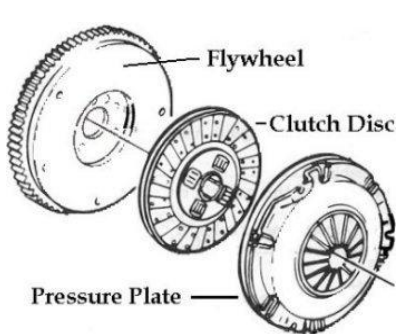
Pressure-clutch mechanism in a car wheel [5]
